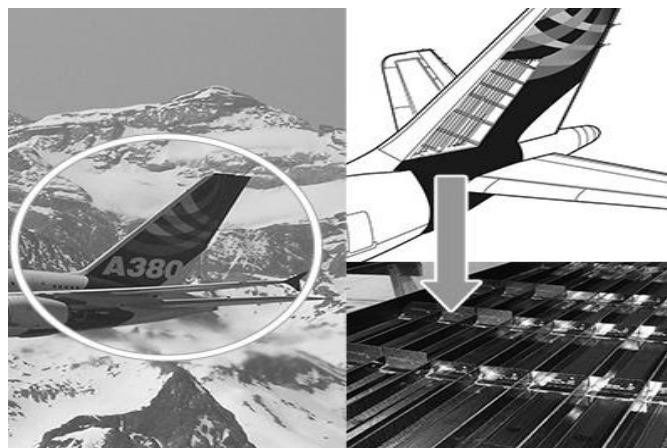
Vertical Stabilizers of the A380 made from pultruded CFRP beams
